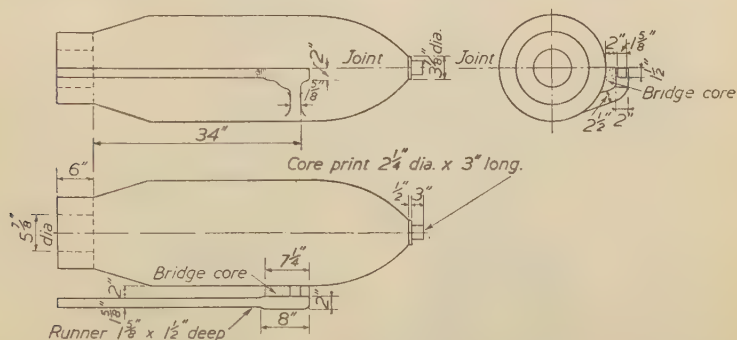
Foundry No. 1. Thin-walled steel castings moulded horizontally and cast vertically.
